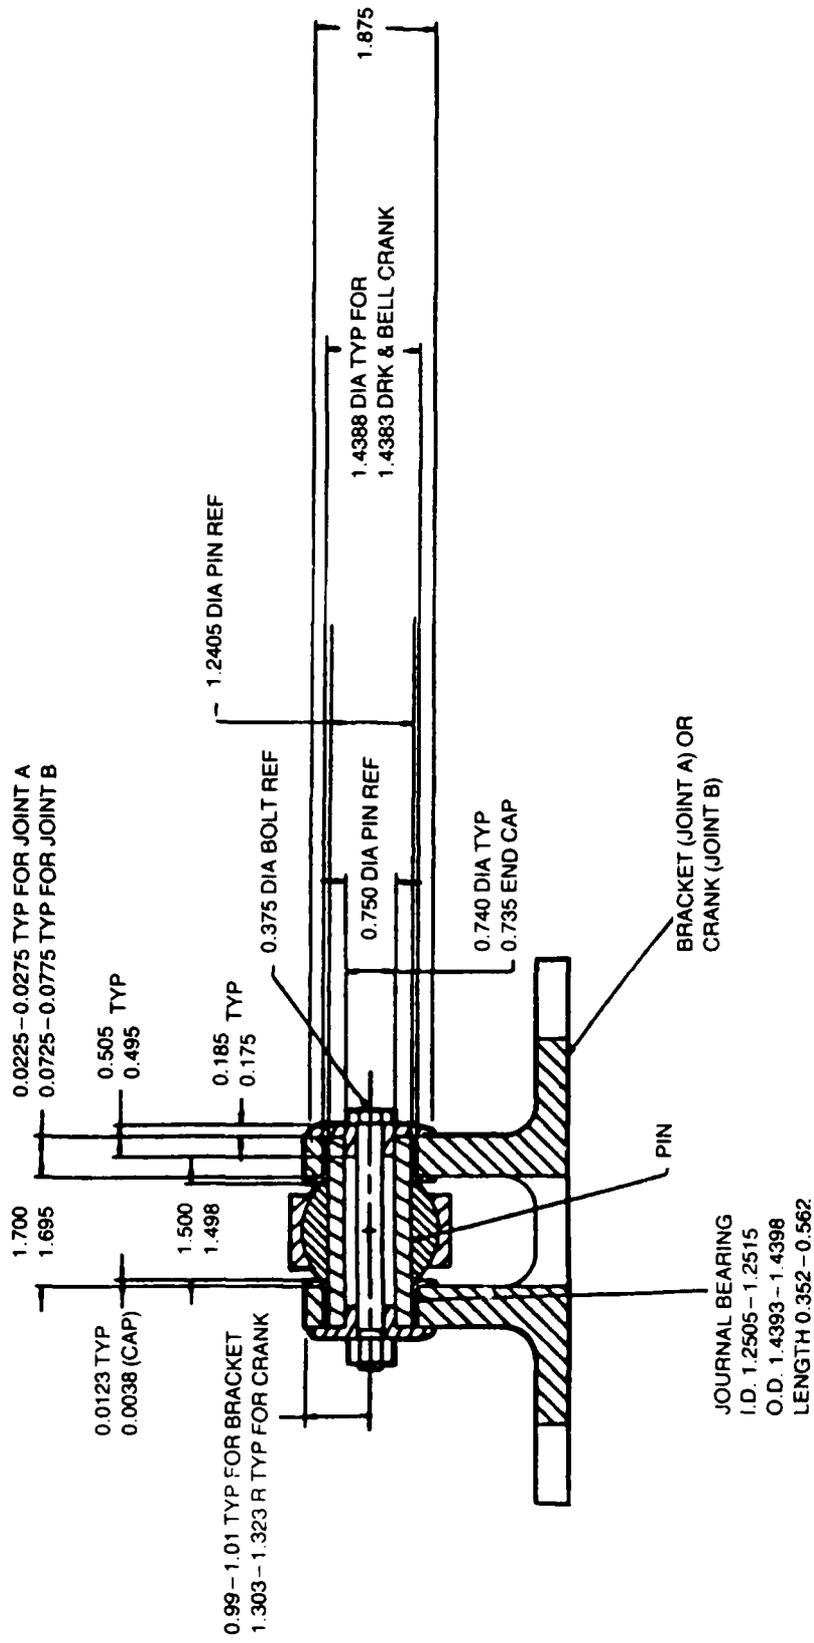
Details of the upper and lower attachment joints of the retractor actuator (Joints A and B in Table II).
